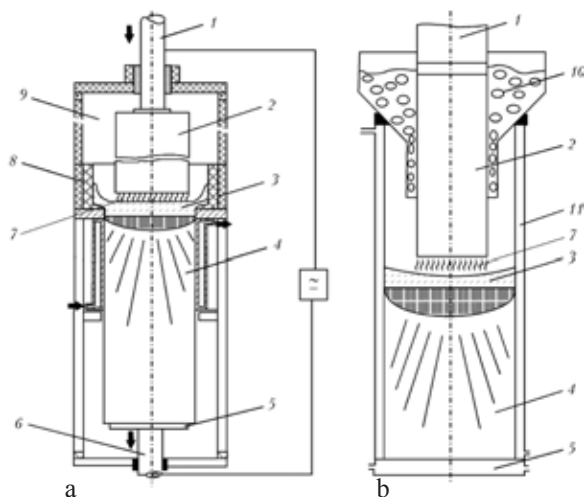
Technology of ASR in a chamber furnace with withdrawal of the billet from a short solidification mould (a) and in a conventional ESR furnace in a stationary solidification mould using a flux gate (b): 1) the head of the consumable electrode, 2) the consumable electrode, 3) the slag pool, 4) the billet, 5) the water-cooled baseplate, 6) the mechanism for withdrawing the billet from the solidification mould, 7) the arc, 8) the lined slag attachment, 9) the furnace chamber, 10) the flux gate, 11) water-cooled solidification mould.
